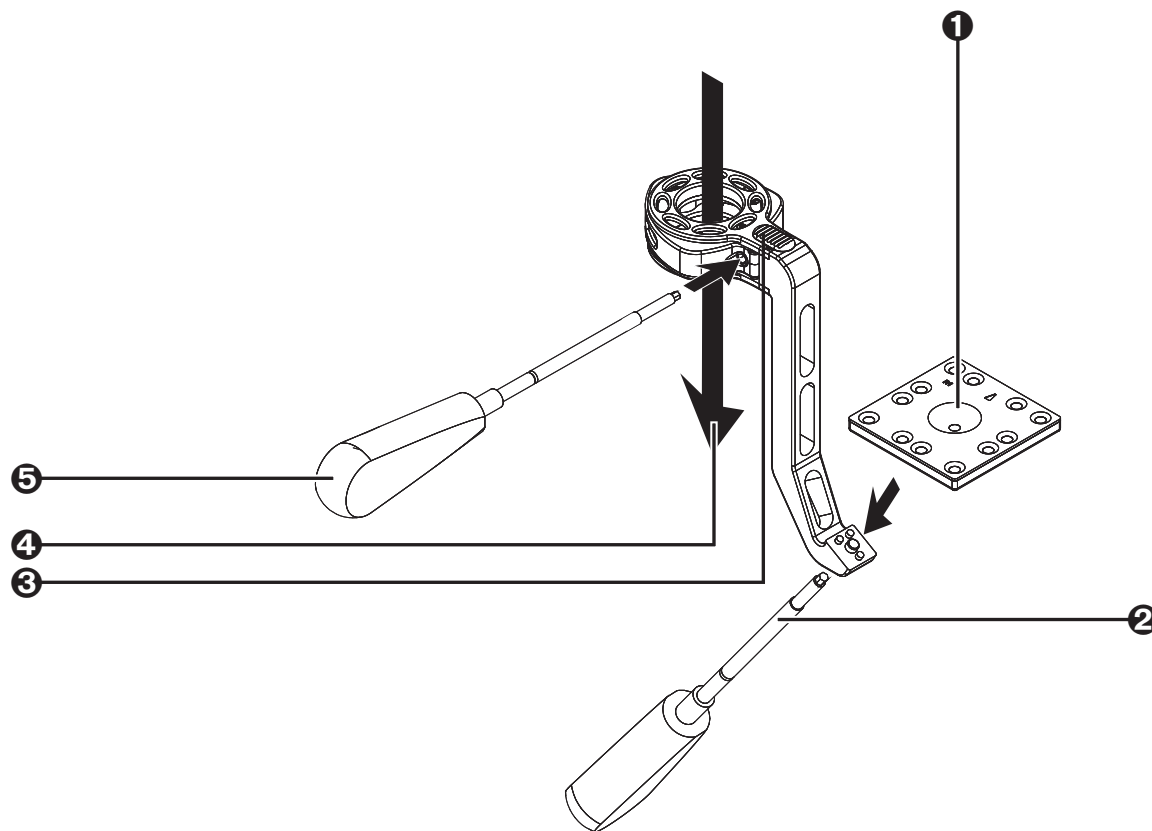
Prepare Surgical Tool for Fixed Universal Tool Adaptor
